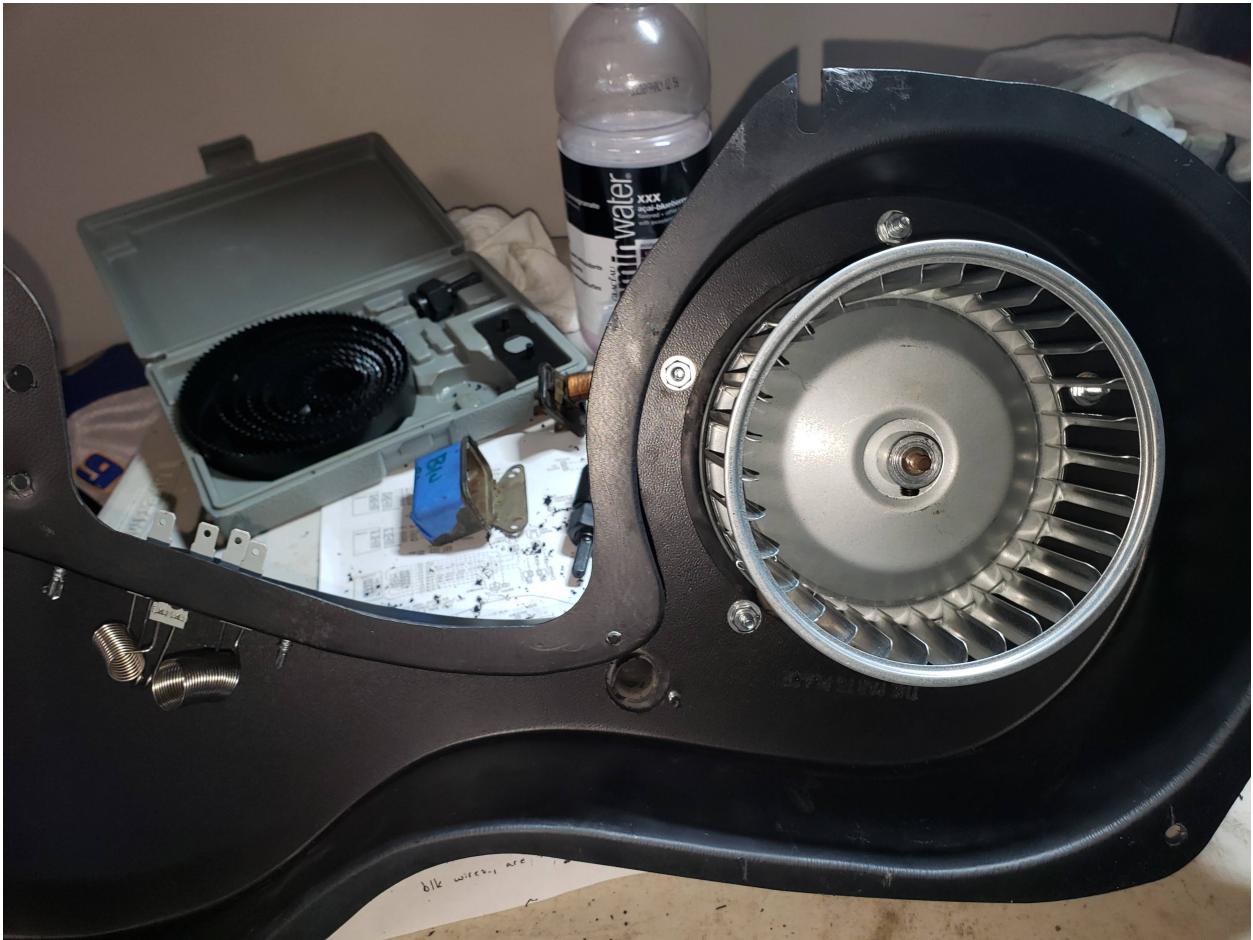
Back side of delete box, with resistor installed and the fresh air into blower fan installed
